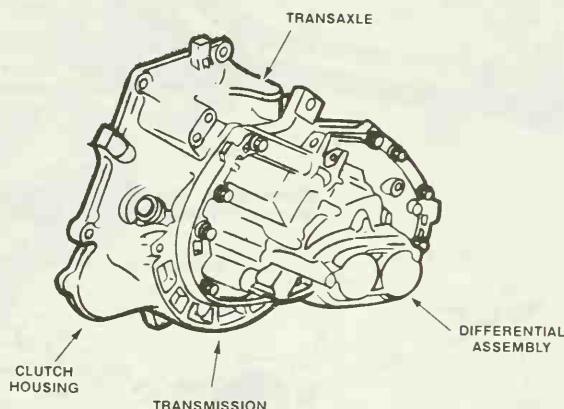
The clutch housing, transmission, and differential are combined in one unit with a transaxle. (Chevrolet Motor Division of General Motors Corporation)
